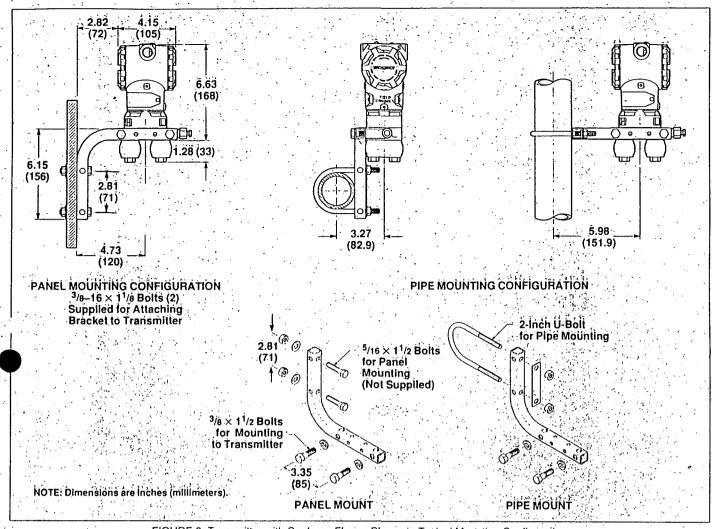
Transmitter with Coplanar Flange Shown in Typical Mounting Configuration with Optional Bracket (Option Code B4) for 2-inch Pipe or Panel Mounting
